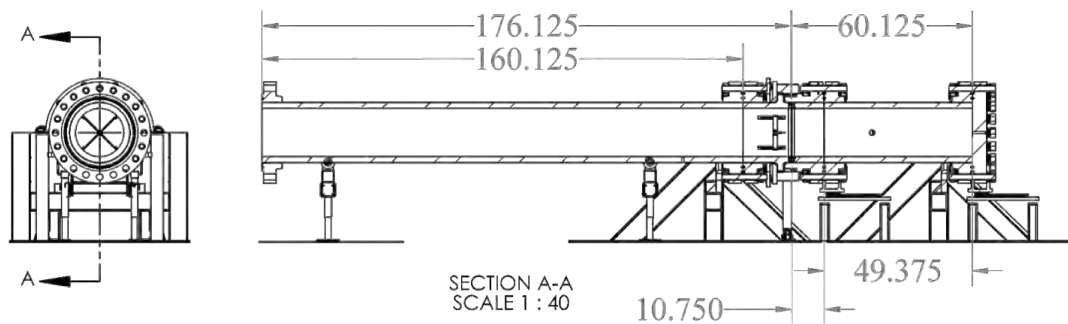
Dimensional drawing for the driver and driven section with lengths of the pipe sections and effective lengths of each section located within the breech assembly.
